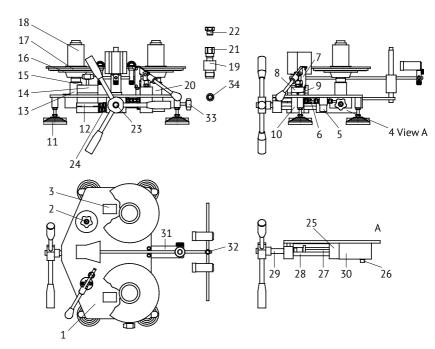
Deadweight tester MP-60, MP-100, MP-250, MP-400 and MP-600 in special version:
